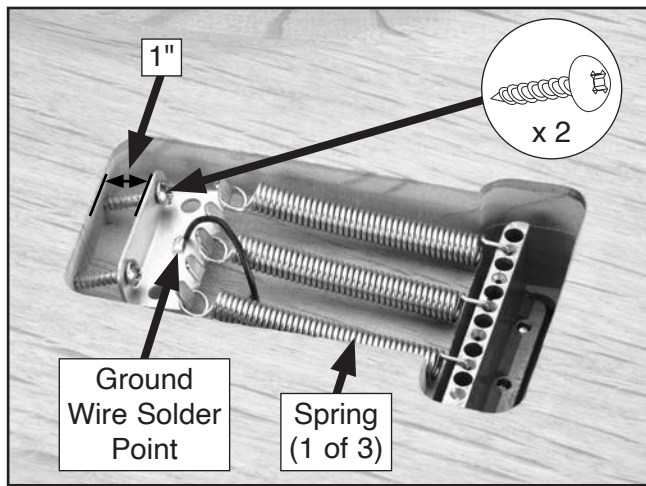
Springs and spring hanger installed, and ground wire soldered to hanger.
